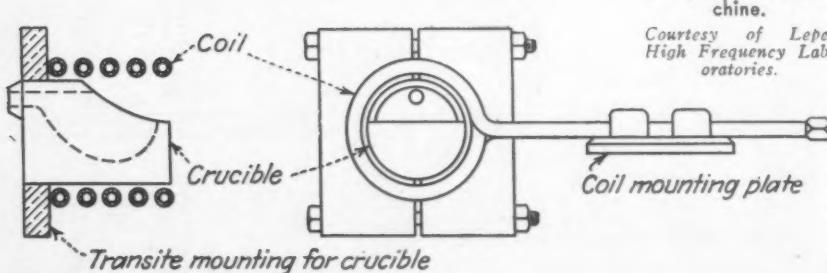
Method of locating a removable induction heating coil about crucible in a centrifugal casting machine.
